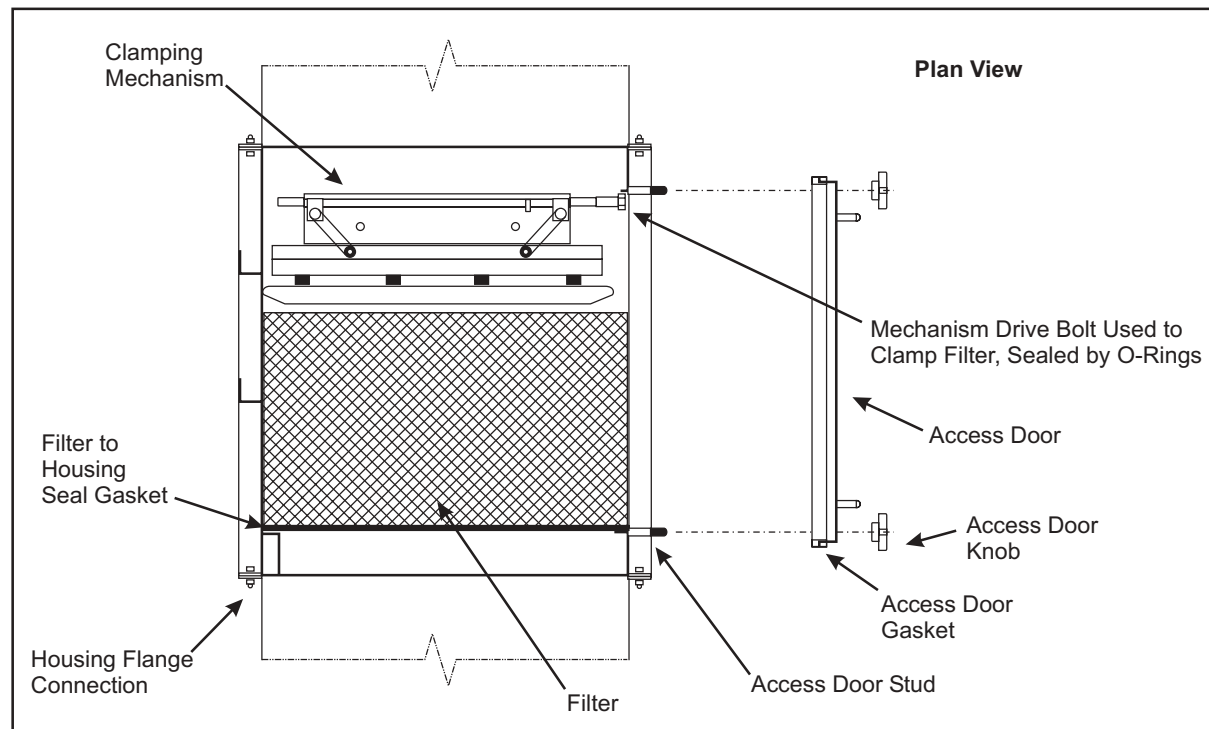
Four-Bar-Linkage Gasket Seal Clamping Mechanism
